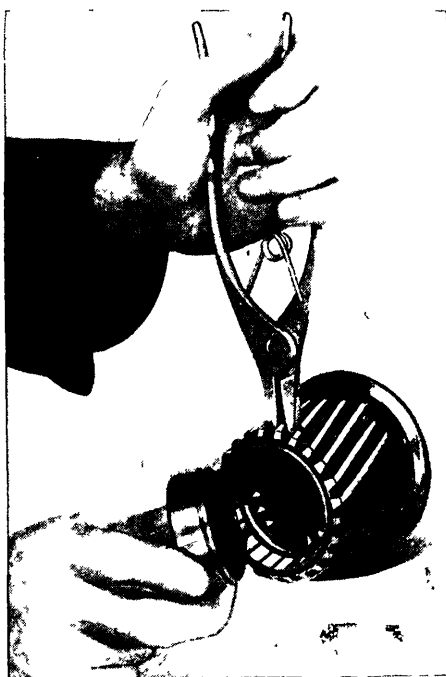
Removing synchr nizer ring from clutch sleeve. 1937-52
